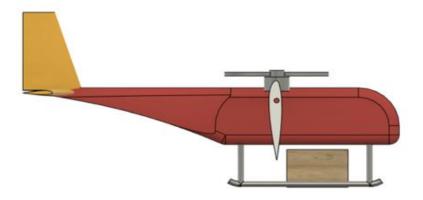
Revised CAD, Side View with Wings Tilted and Cargo Lowered
